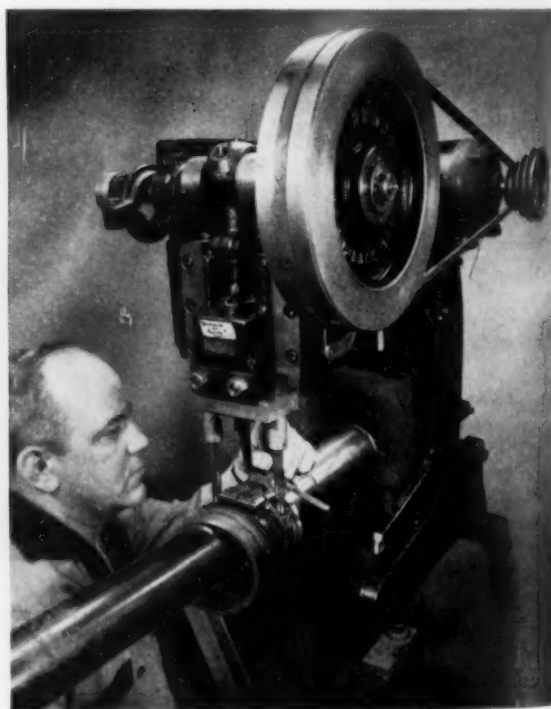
After forming a labyrinth coil, this machine accurately cuts the spiral into individual seals.
